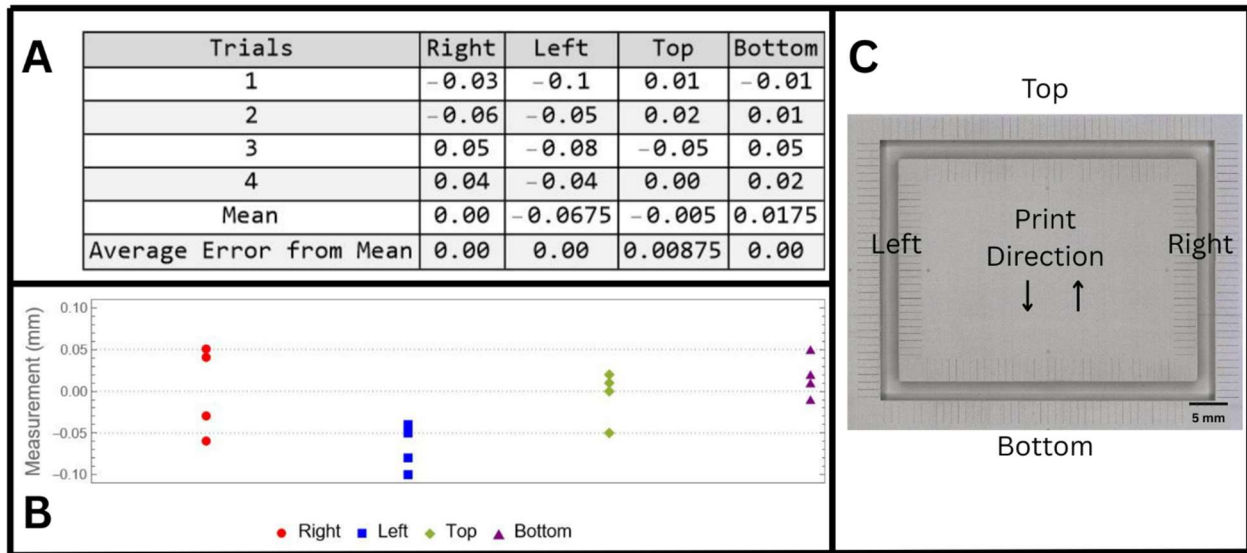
A) Table of measured alignment. B) Graph of measured alignment. C) Figure showing label directions on an assembled part.
